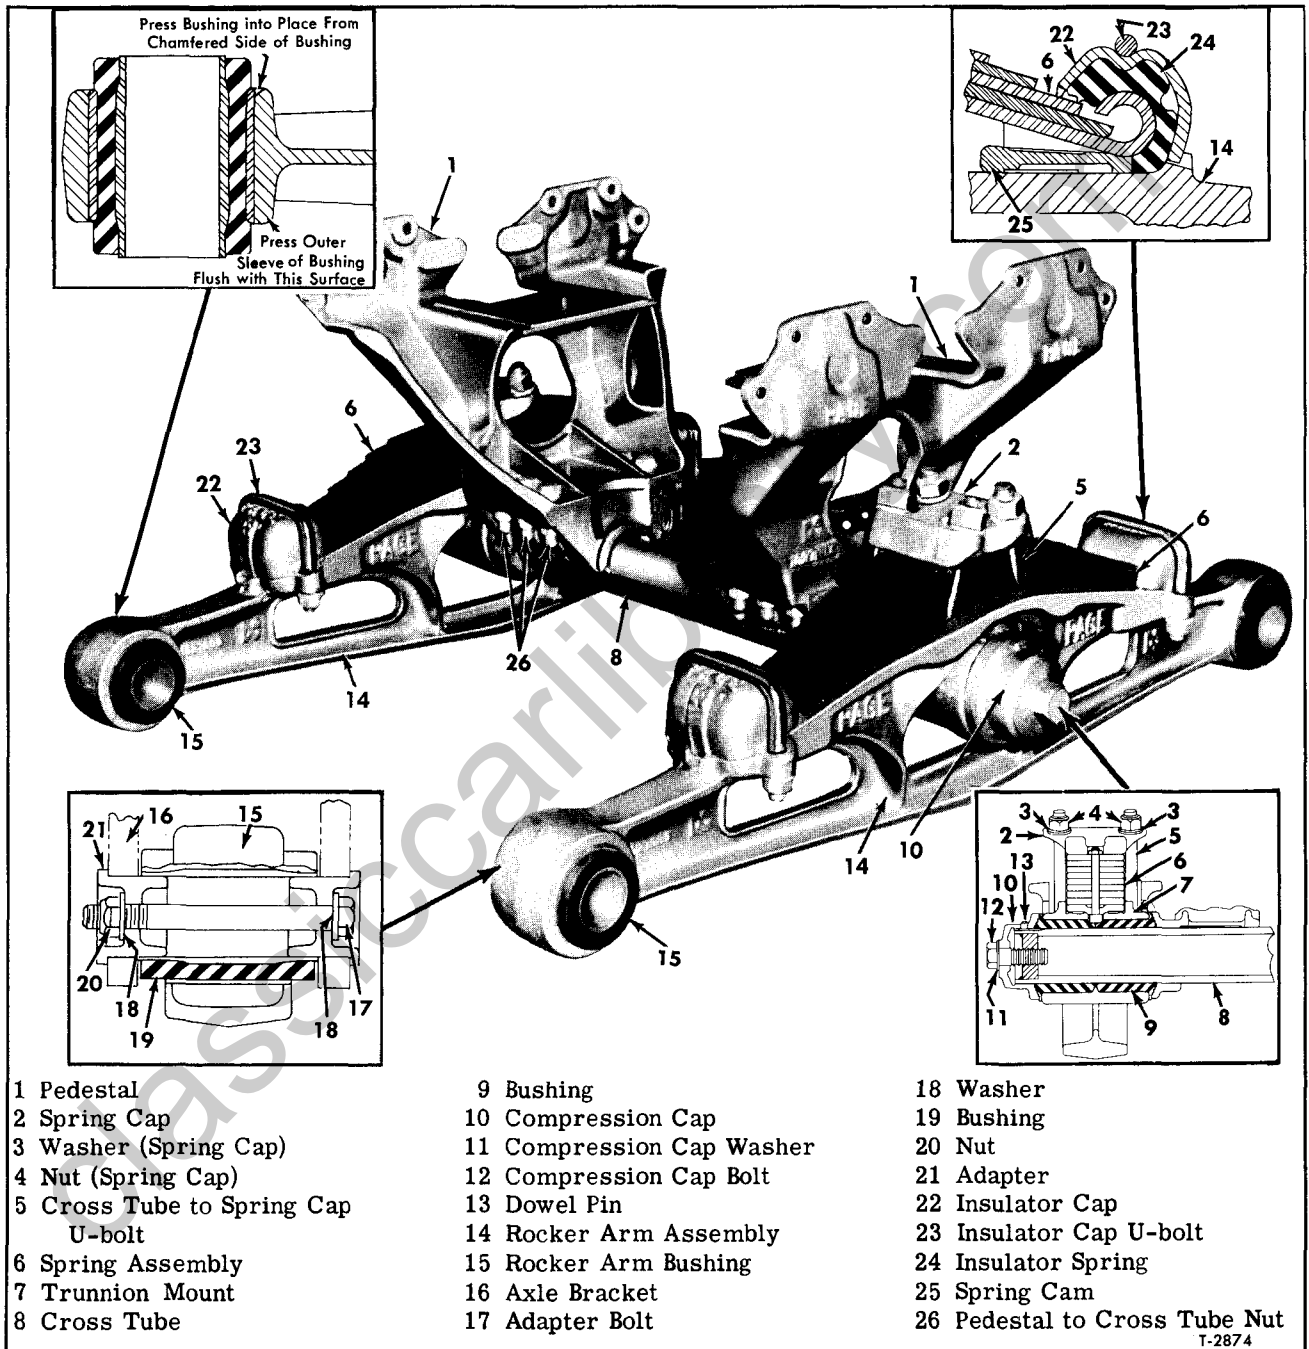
Page and Page (LWH) Rear Suspension Removed (Typical)
